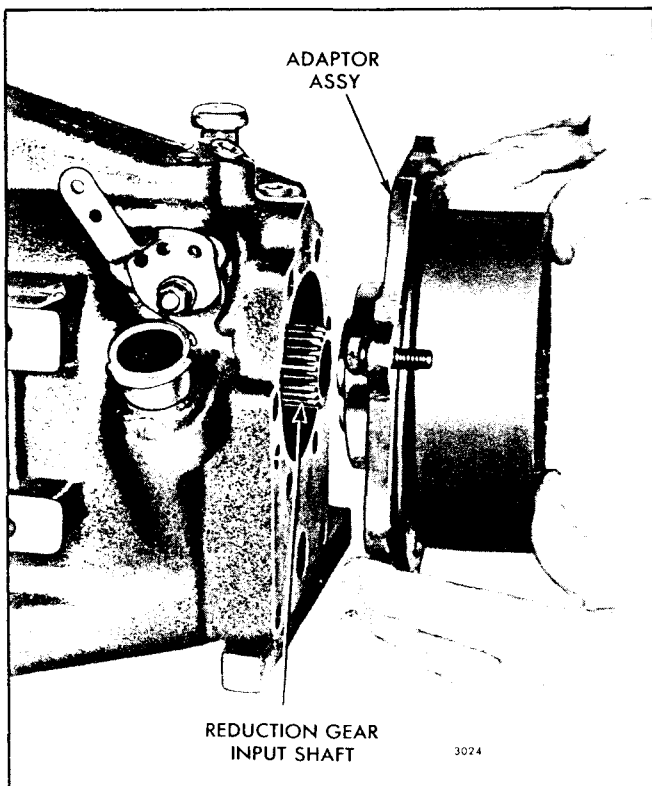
Installing Reduction Gear Adaptor, Input Gear, Ring Gear and Bearing Assembly to Reverse Gear Housing (1.5:1 Ratio)
